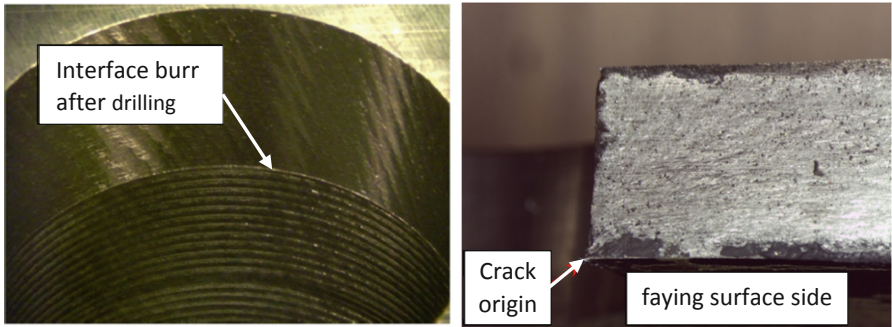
Fracture origin at burr – titanium joint fatigue test specimen
